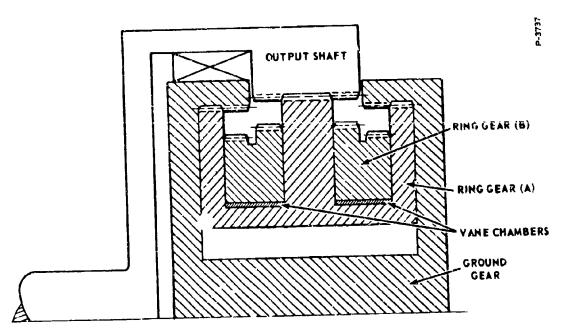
External Mesh Balance Configuration (Both Gears Working)
